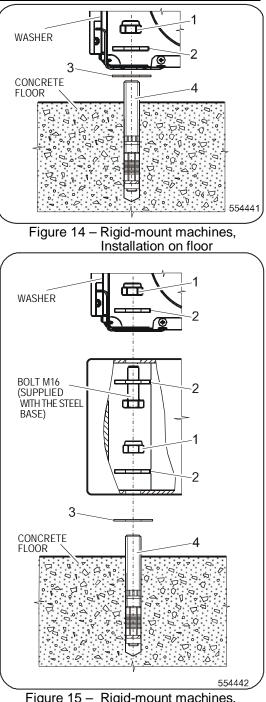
Rigid-mount machines, Installation on a steel base and floor
